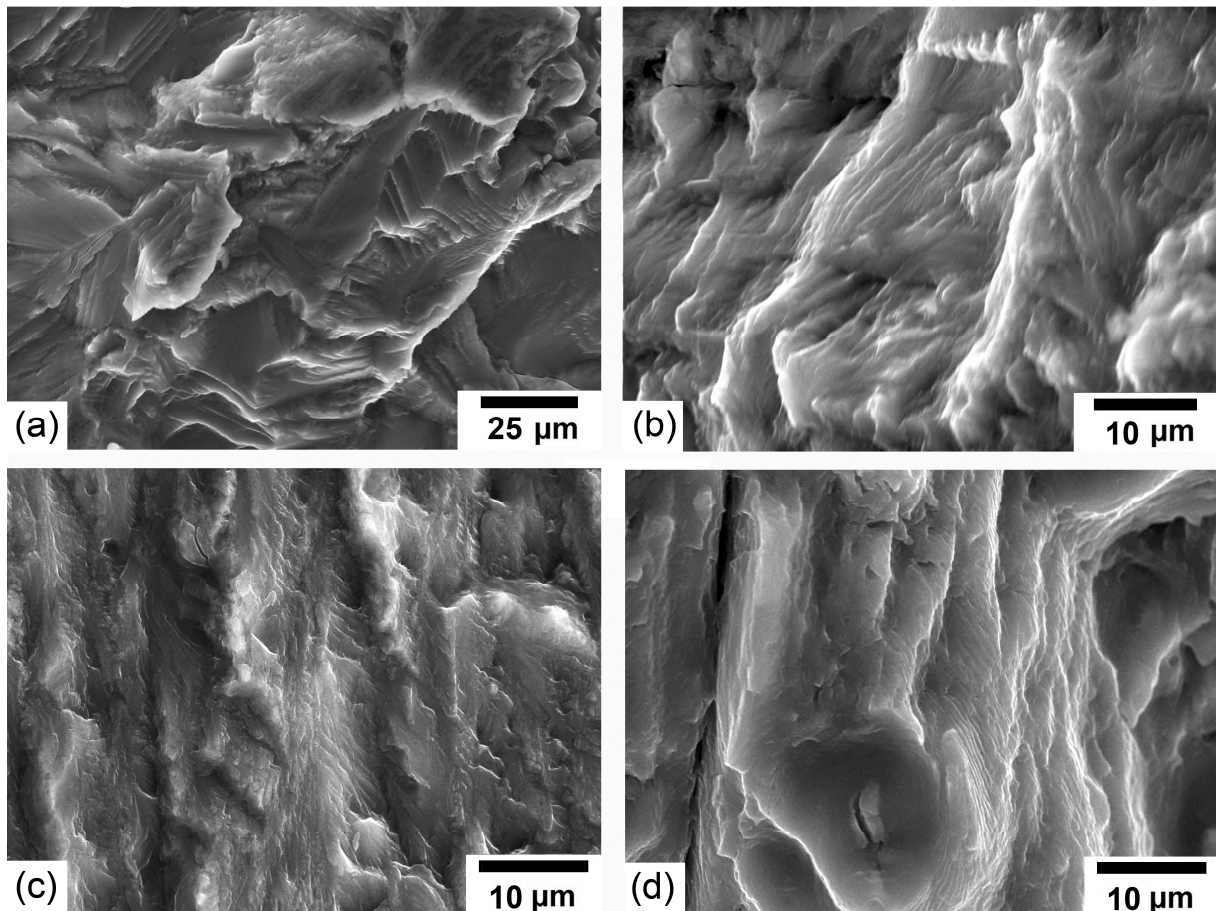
Fracture surfaces of the fatigue specimens fractured after 10^7 cycles: (a) as-cast; (b) HR75; (c) CR50; (d) CR80.
